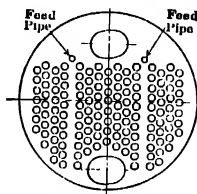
Tube Arrangement—"Uni-flow" Boiler.
